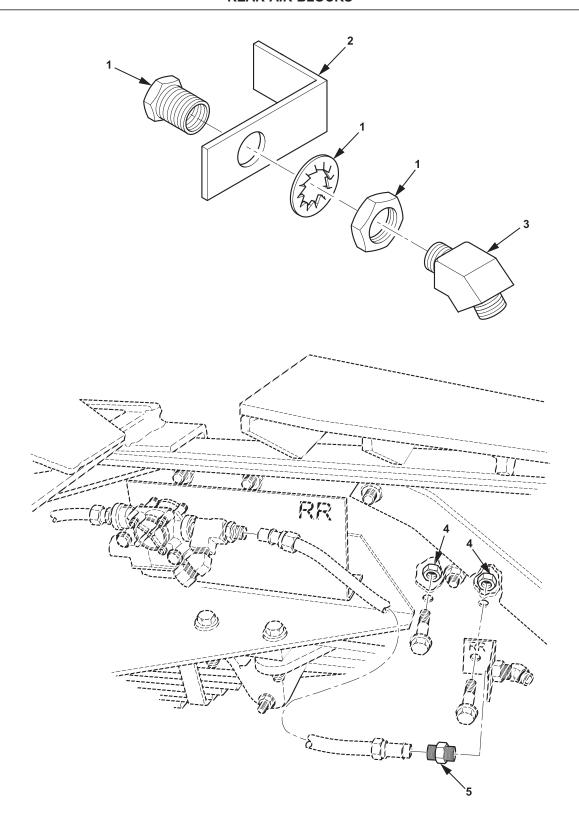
Rear Air Blocks (Sheet 1 of 2).
